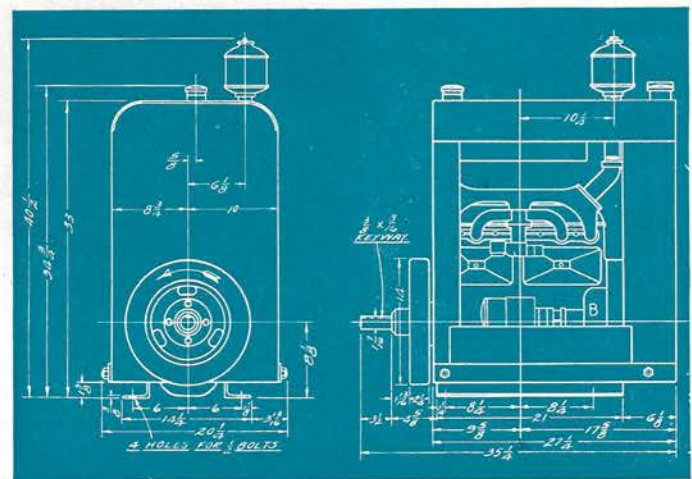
Novo Four Cylinder Engine equipped with bell housing and clutch
